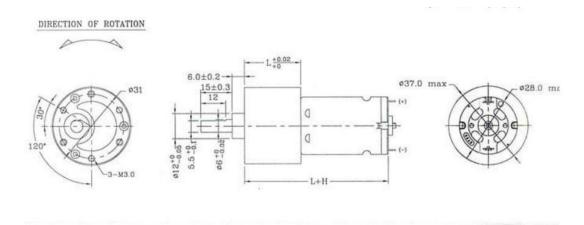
The physical dimensions of the Mantech EGB 12 V (0.196Nm) DC motor.
